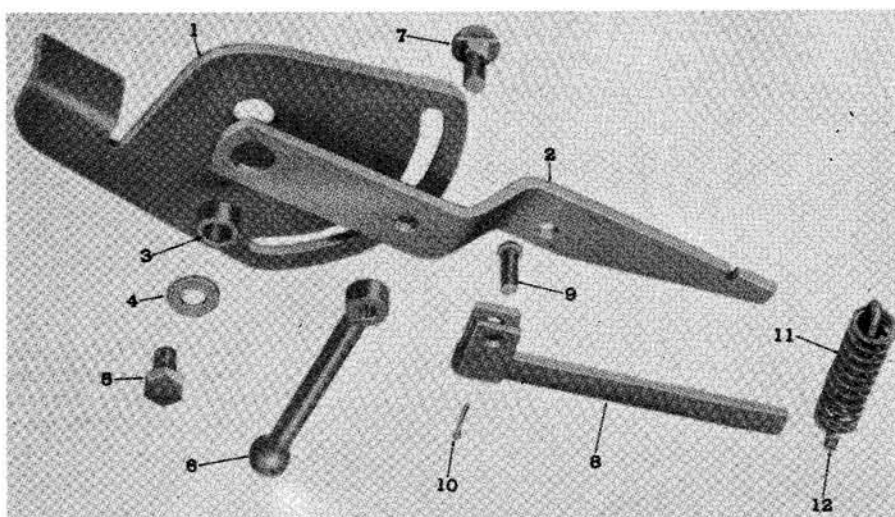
Exploded view of position control attachment. Plate (1) is mounted on right end of lift shaft (10—Fig. 189) with projection on plate placed under lift arm. Downward movement of lift arm then moves spring loaded arm (8) upward returning control lever from lowering position to neutral position at desired lift arm height. Adjustment is made by clamping arm (2) to desired position on plate (1).
